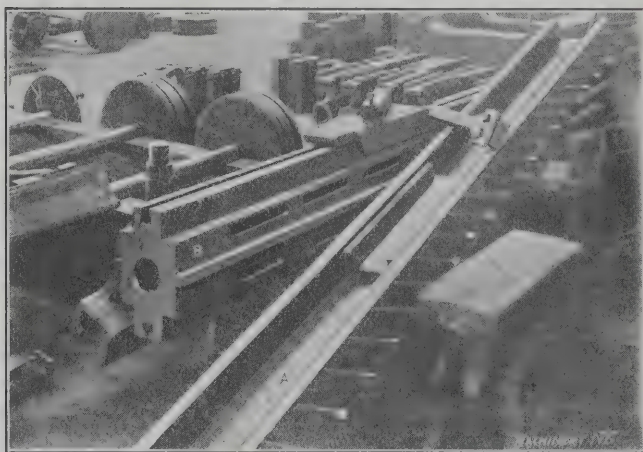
The Fixtures used for Holding Shoes while planing the inside and Flanges
